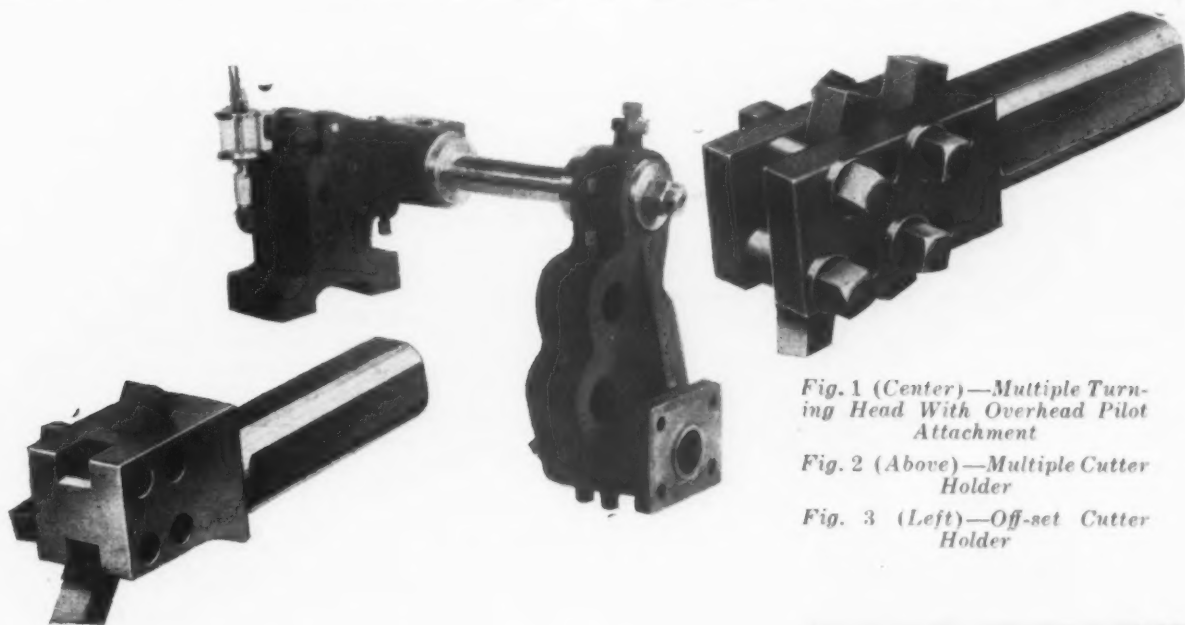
(Center)—Multiple Turning Head With Overhead Pilot Attachment
